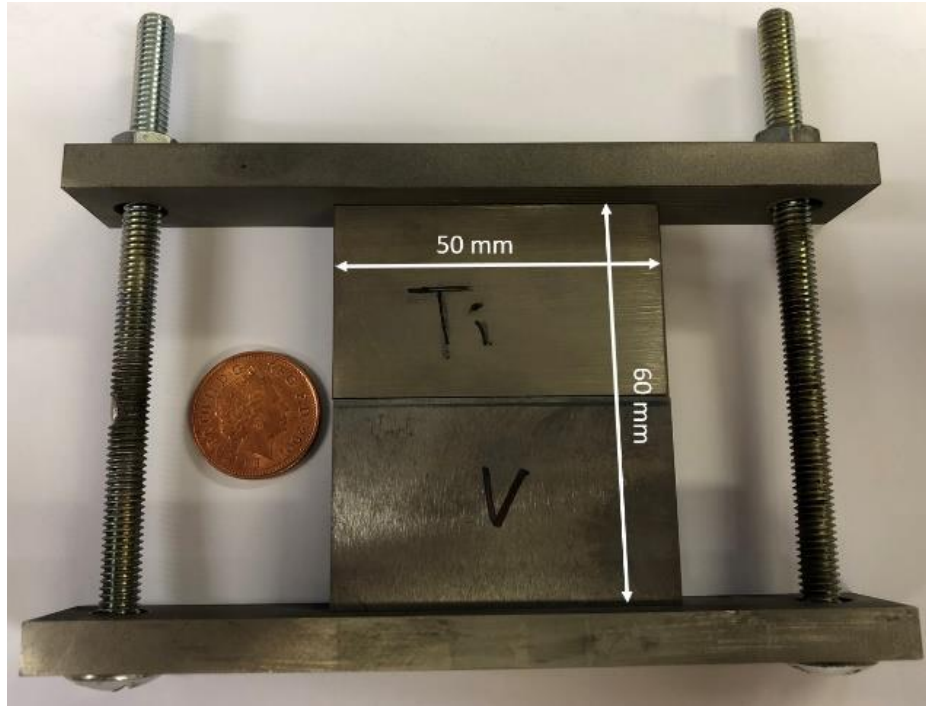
Shows the fixture used to hold the dissimilar plates into butt position pre-welding operation.
